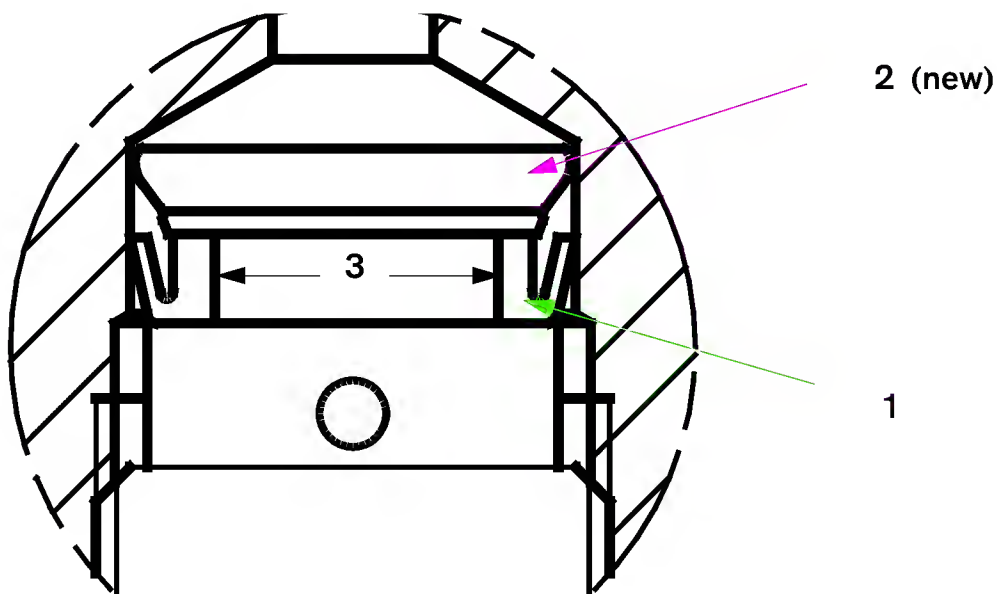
Sectional view of NIST, DISS connectors (end piece) in the gas inlet block
